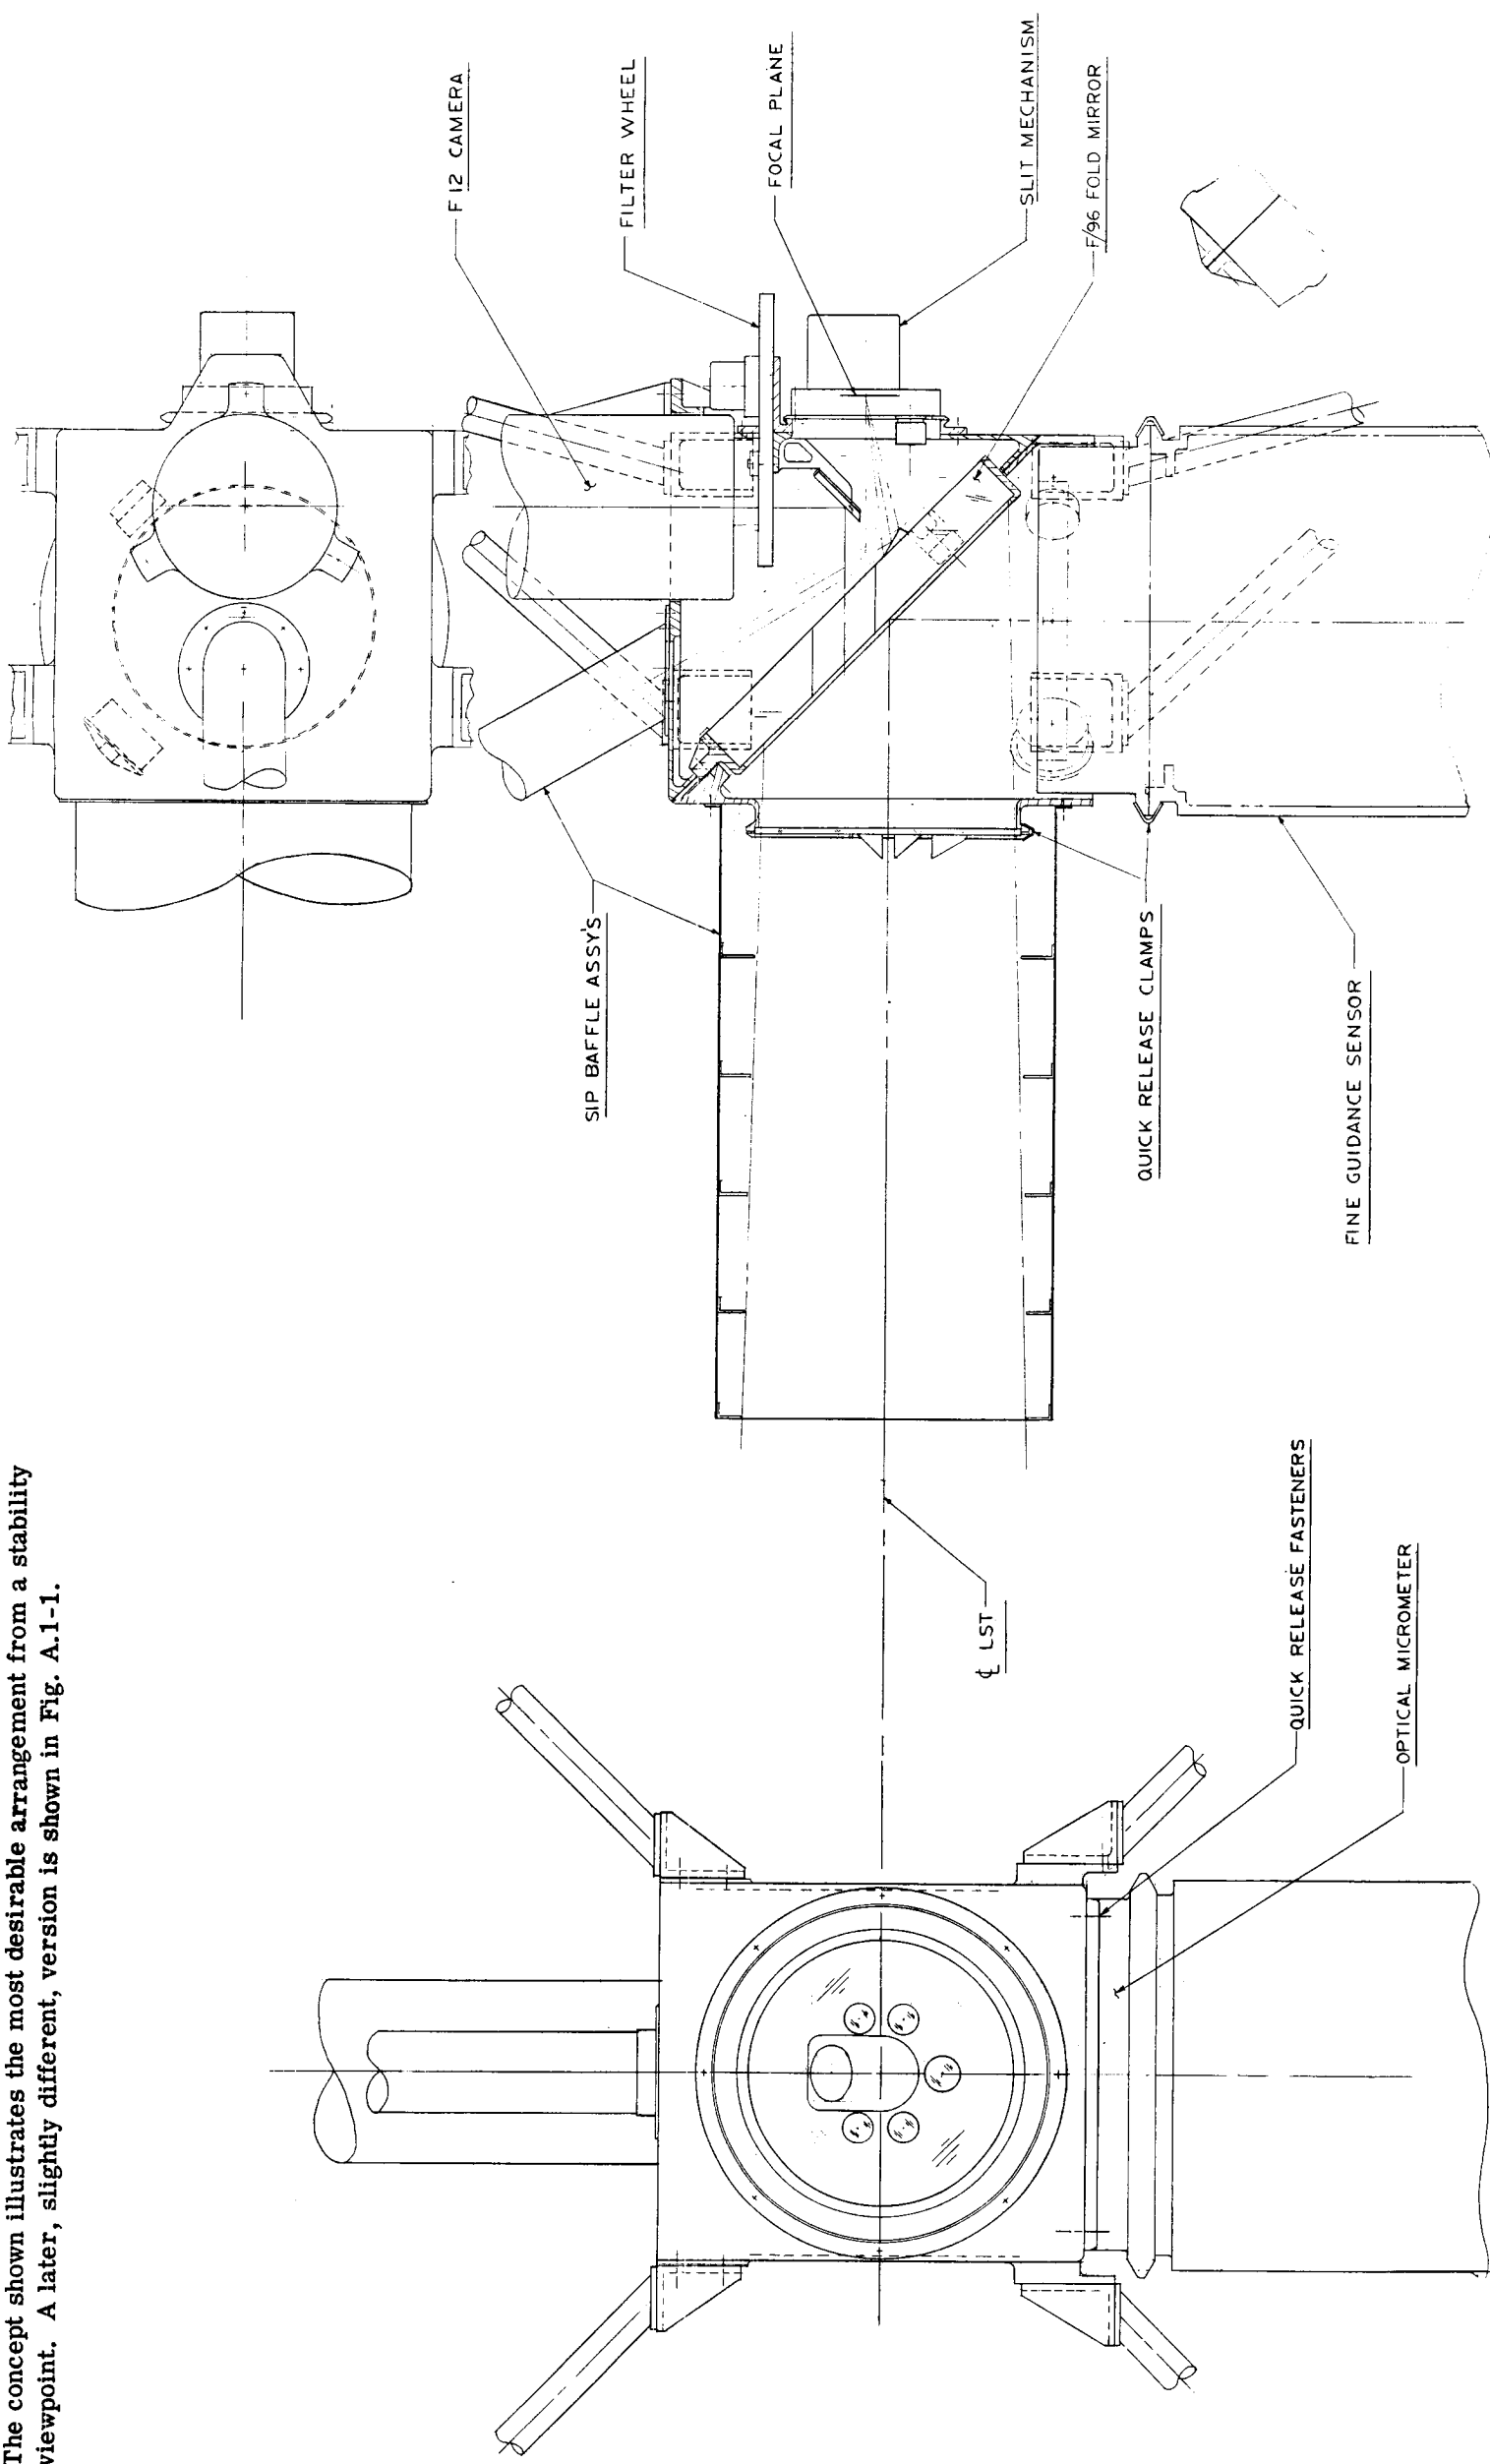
Fold optics layout (drawing no. 185514)
